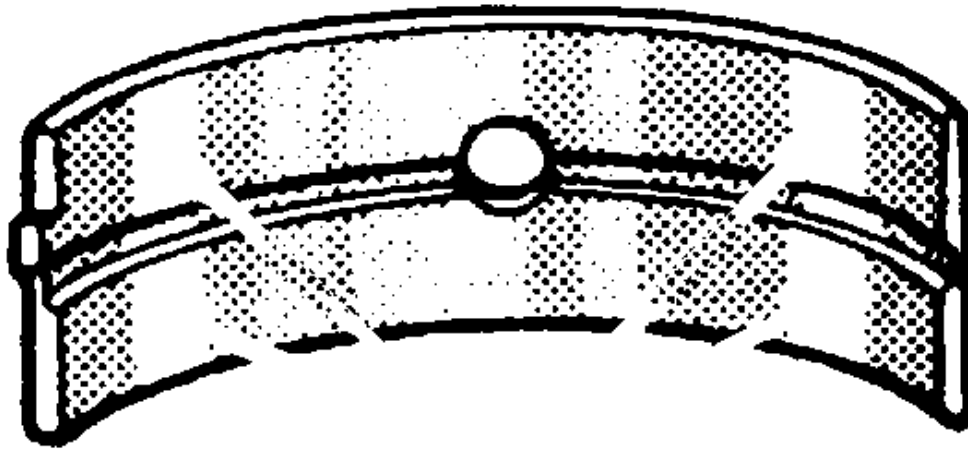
Crankshaft Bearing Polished Sections (Improper Seating)
